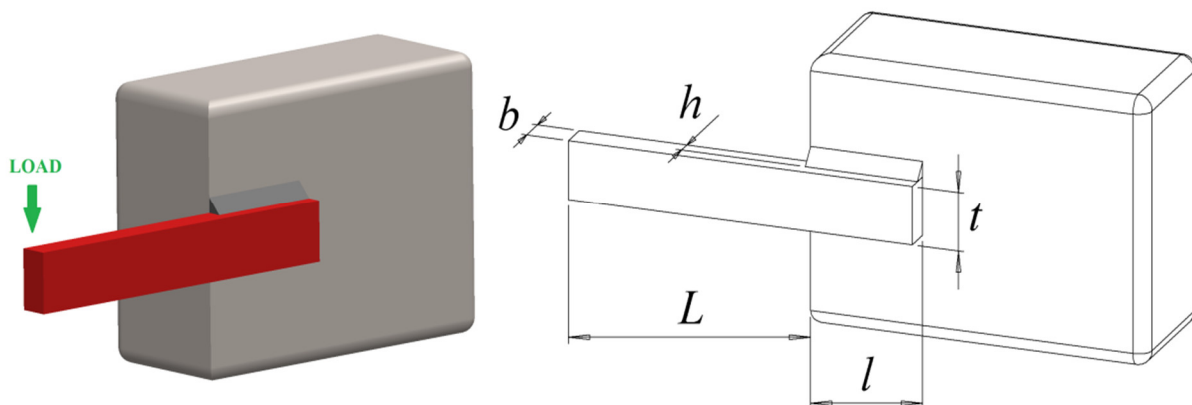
Welded beam design problem: three-dimensional model diagram (left), structure parameters (right).
